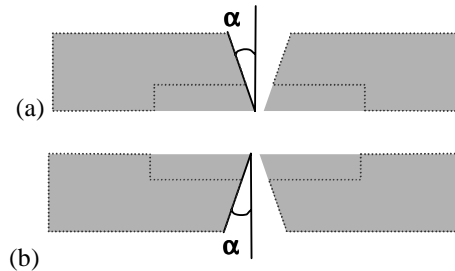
Nozzle diverging part fabrication (the final structure is outlined): (a) positive angle, (b) negative angle.
